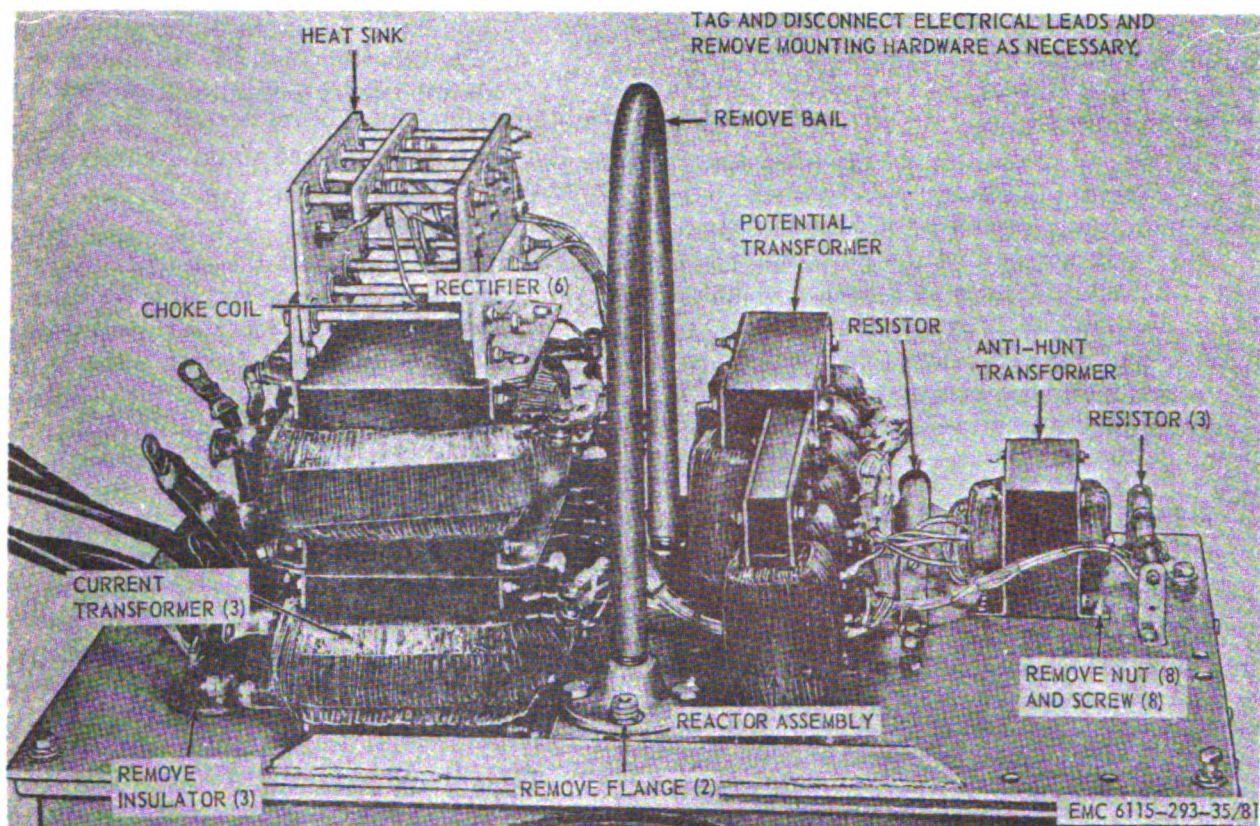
Heat sink, transformers, resistors, and choke, removal and installation.
